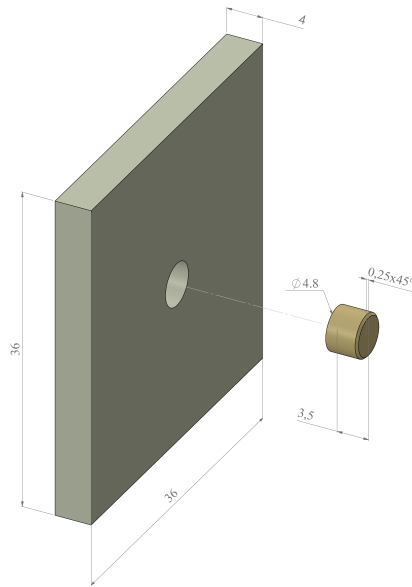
geometry of the test mass, with frame and cylindrical insert (courtesy of Nicolangelo Favia). Dimensions in mm.
